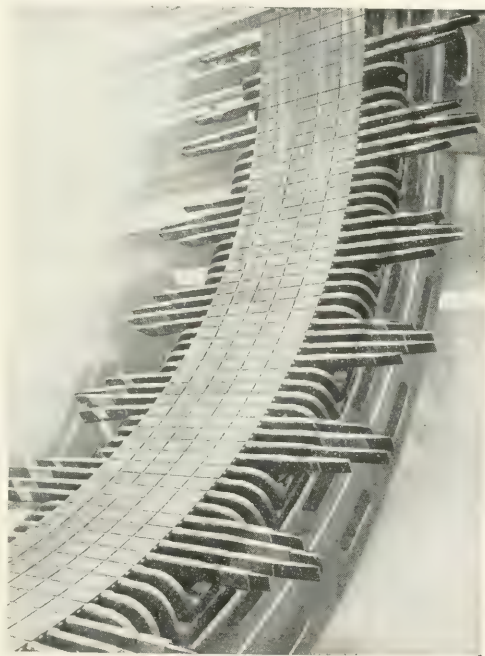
CONCENTRIC COILS OF THE SHOVED-THROUGH TYPE
